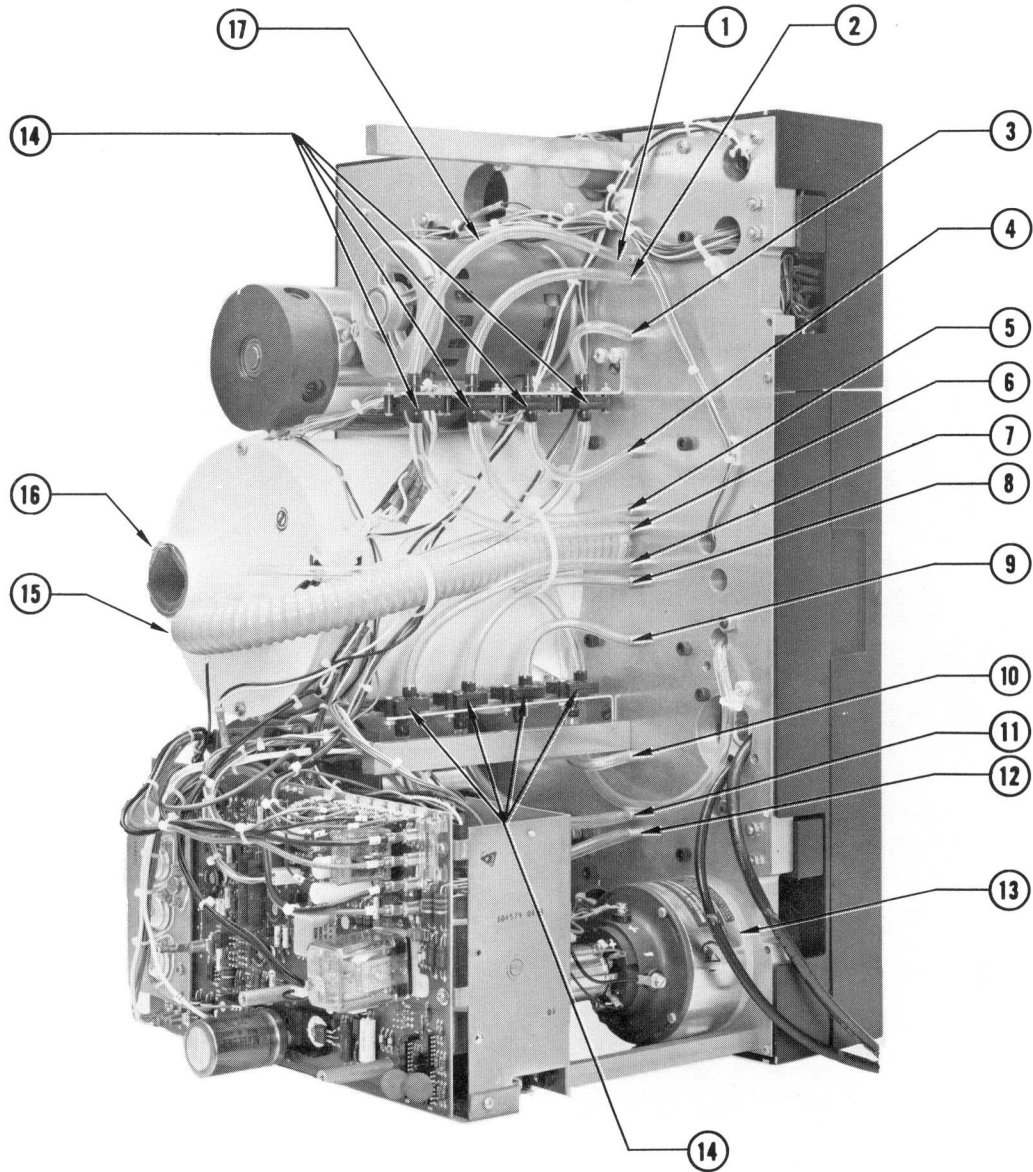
TU45 Transport Photo Parts Index, Rear View, PCBA's Removed
